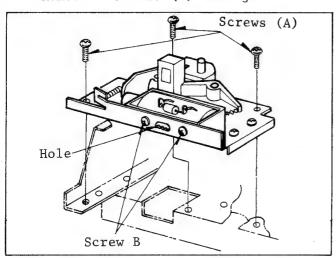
Clearance Adjustment of Eject Solenoid-(1)
